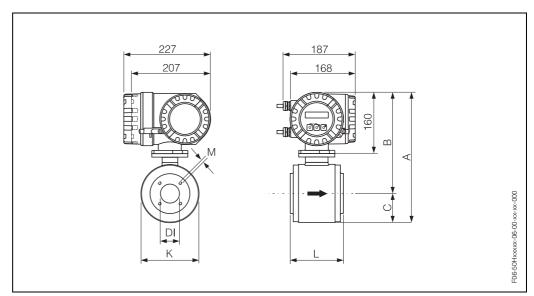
Dimensions Promag H / DN 40...100 (compact version, aluminum field housing)
